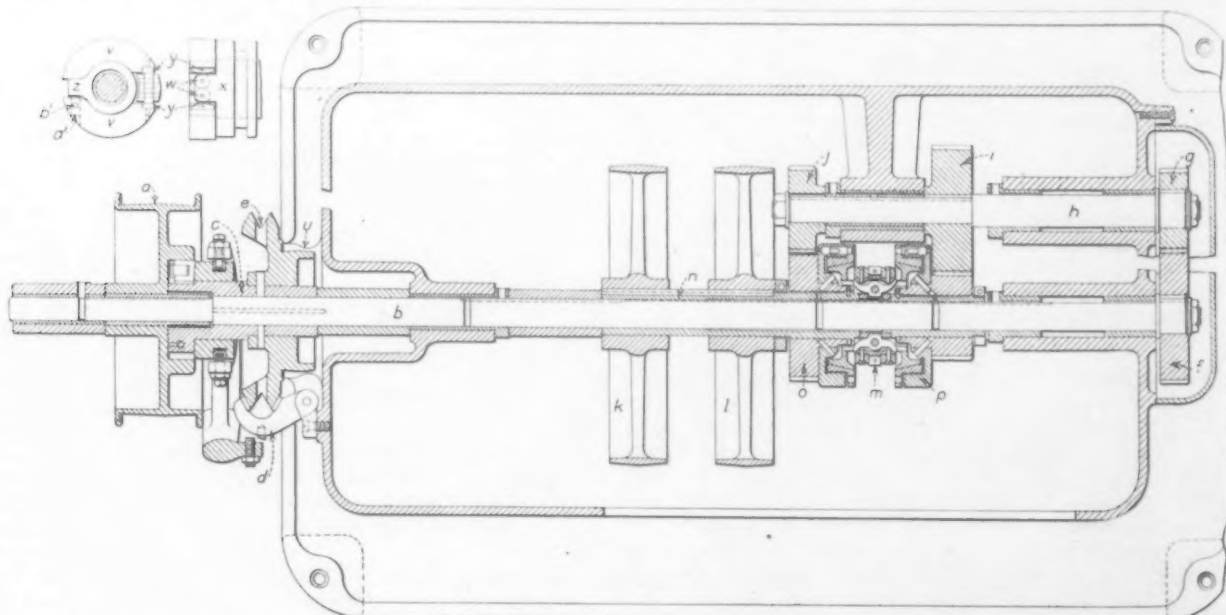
Section Through the Main Driving Shaft Showing the Arrangement of the Various Gears and Pulleys
